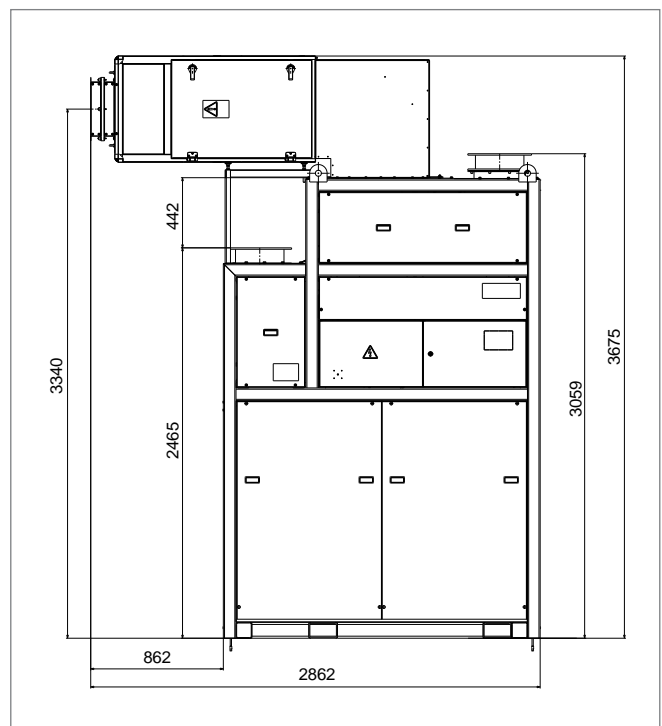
Dimensional drawing for fresh air module, horizontal (dimensions in mm)
